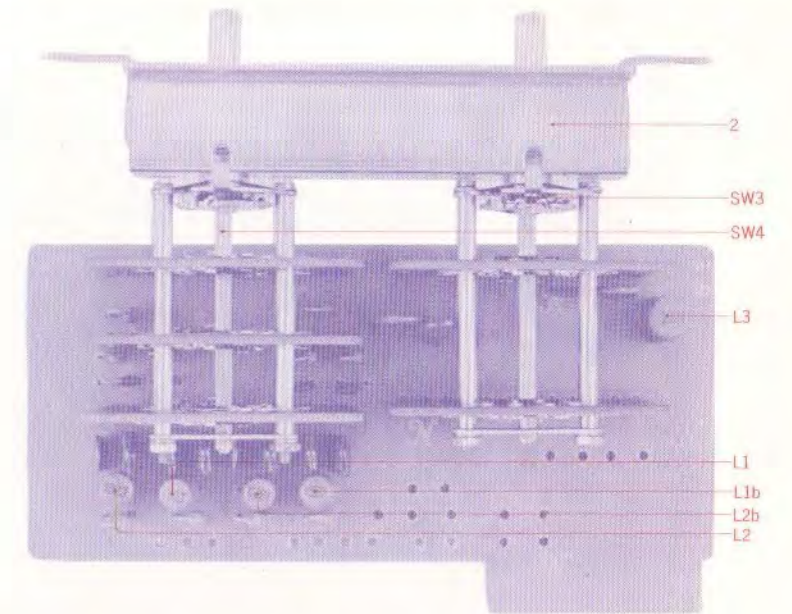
PHOTO OF EQ. P.C. BOARD (KJ-5022) BLOCK
